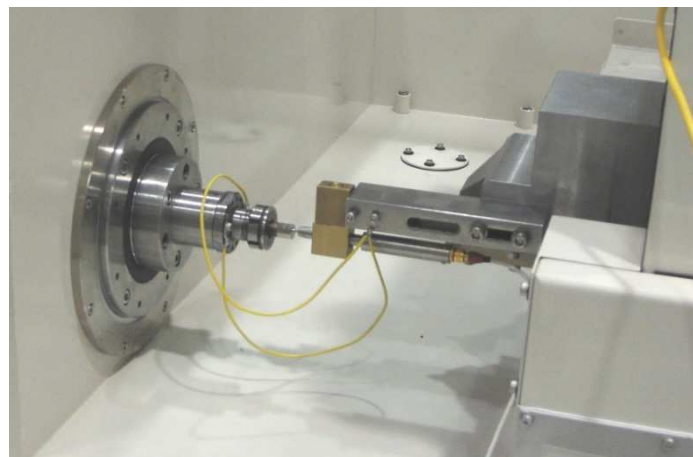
Inspection of step response of ultra precision cutting machine with linear motor slider
